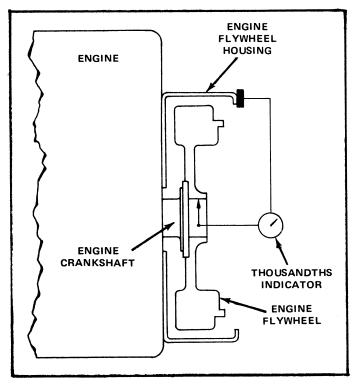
Checking Pilot Bearing Bore of Flywheel.
